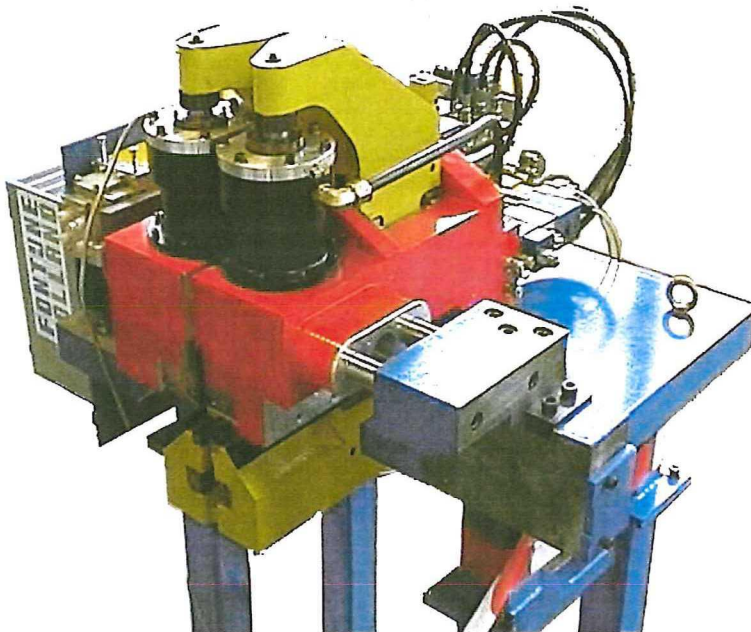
Upset butt weld apparatus: the Fontijne Holland Welder
